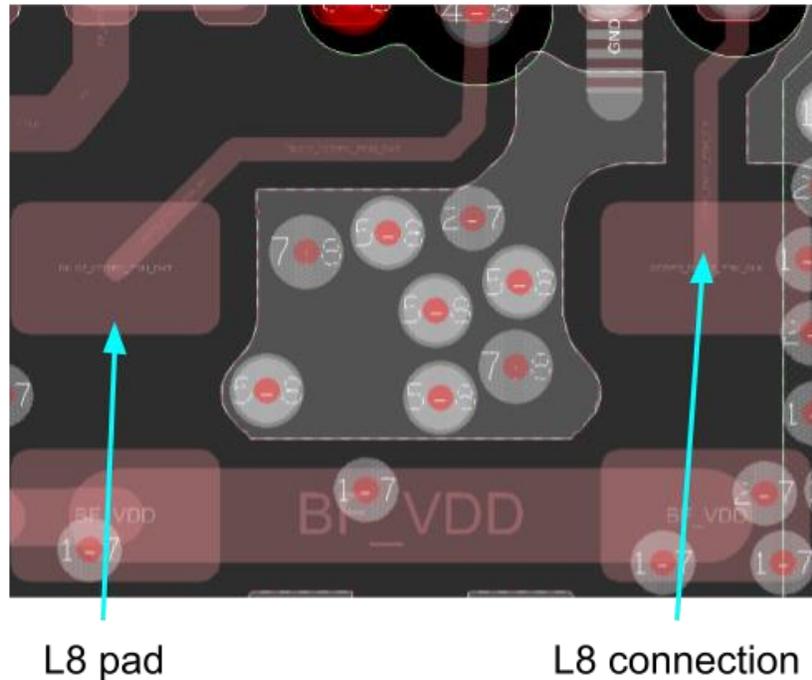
Layout of an example layer (L8) of a printed circuit board
